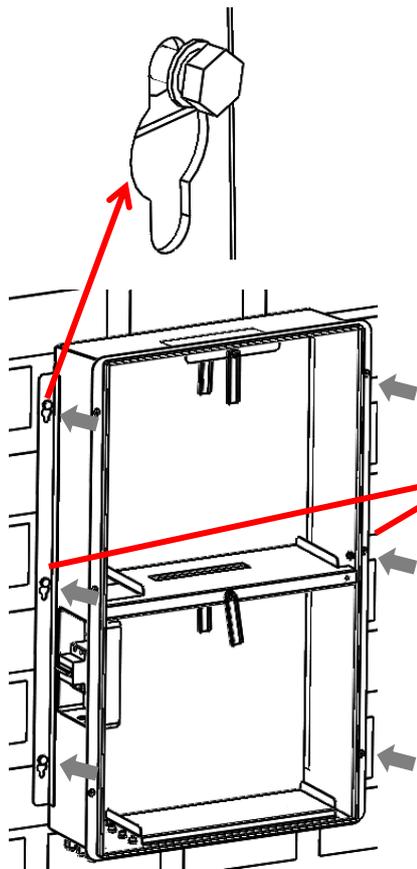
Use cardboard template provided to do wall-mount hole "marking"
